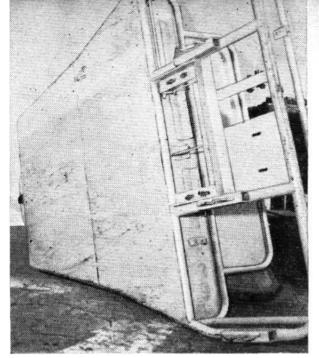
Weld 16-gauge-steel floor to frame bottom. Install crosswise so that scrap pieces can be used.
